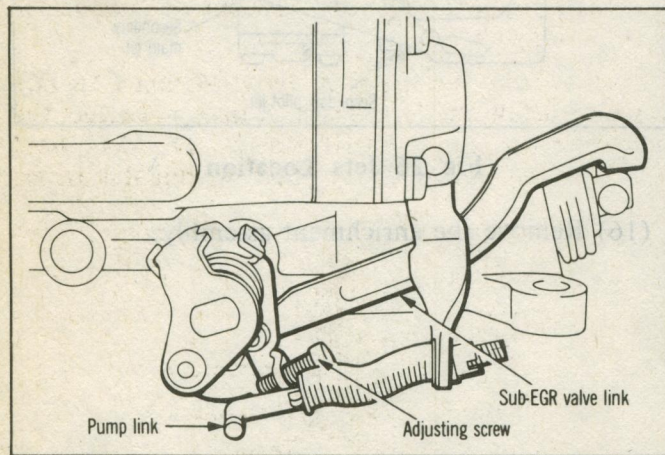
Removing Pump Link and Sub-EGR Valve Link
